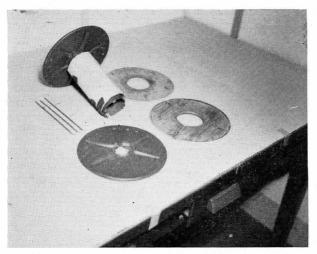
COIL WINDING FORM MADE FROM REEL DR-8 AND WOODEN END PIECES.
